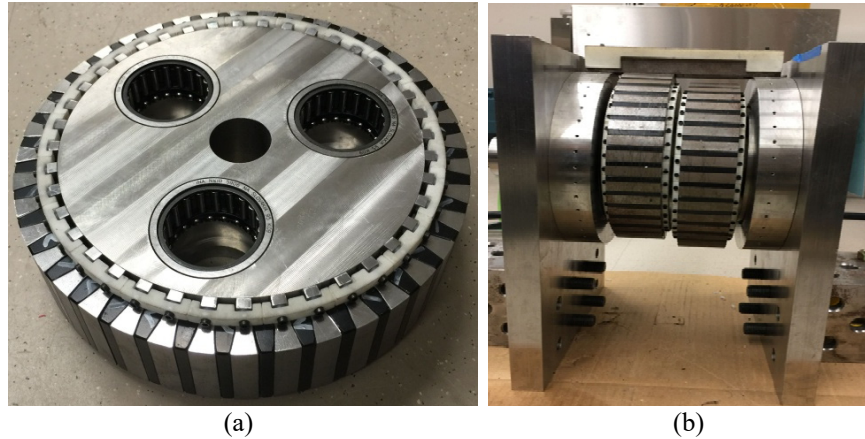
(a) One inner rotor assembled and (b) both of the inner rotors assembled.
